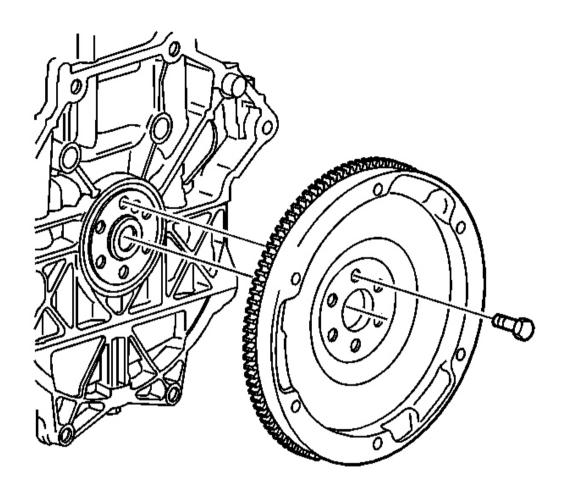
Flywheel-To-Crankshaft Bolts Courtesy of GENERAL MOTORS CORP.
